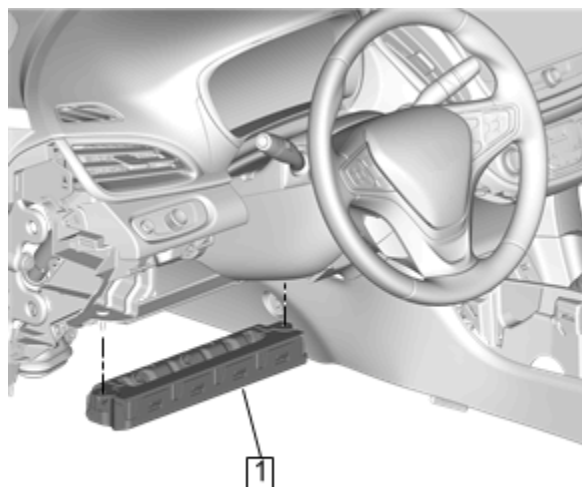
Instrument Panel Lower Airbag - Driver Side
